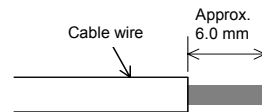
Recommended Strip Length of the Cable Wire End for Terminal Connection
